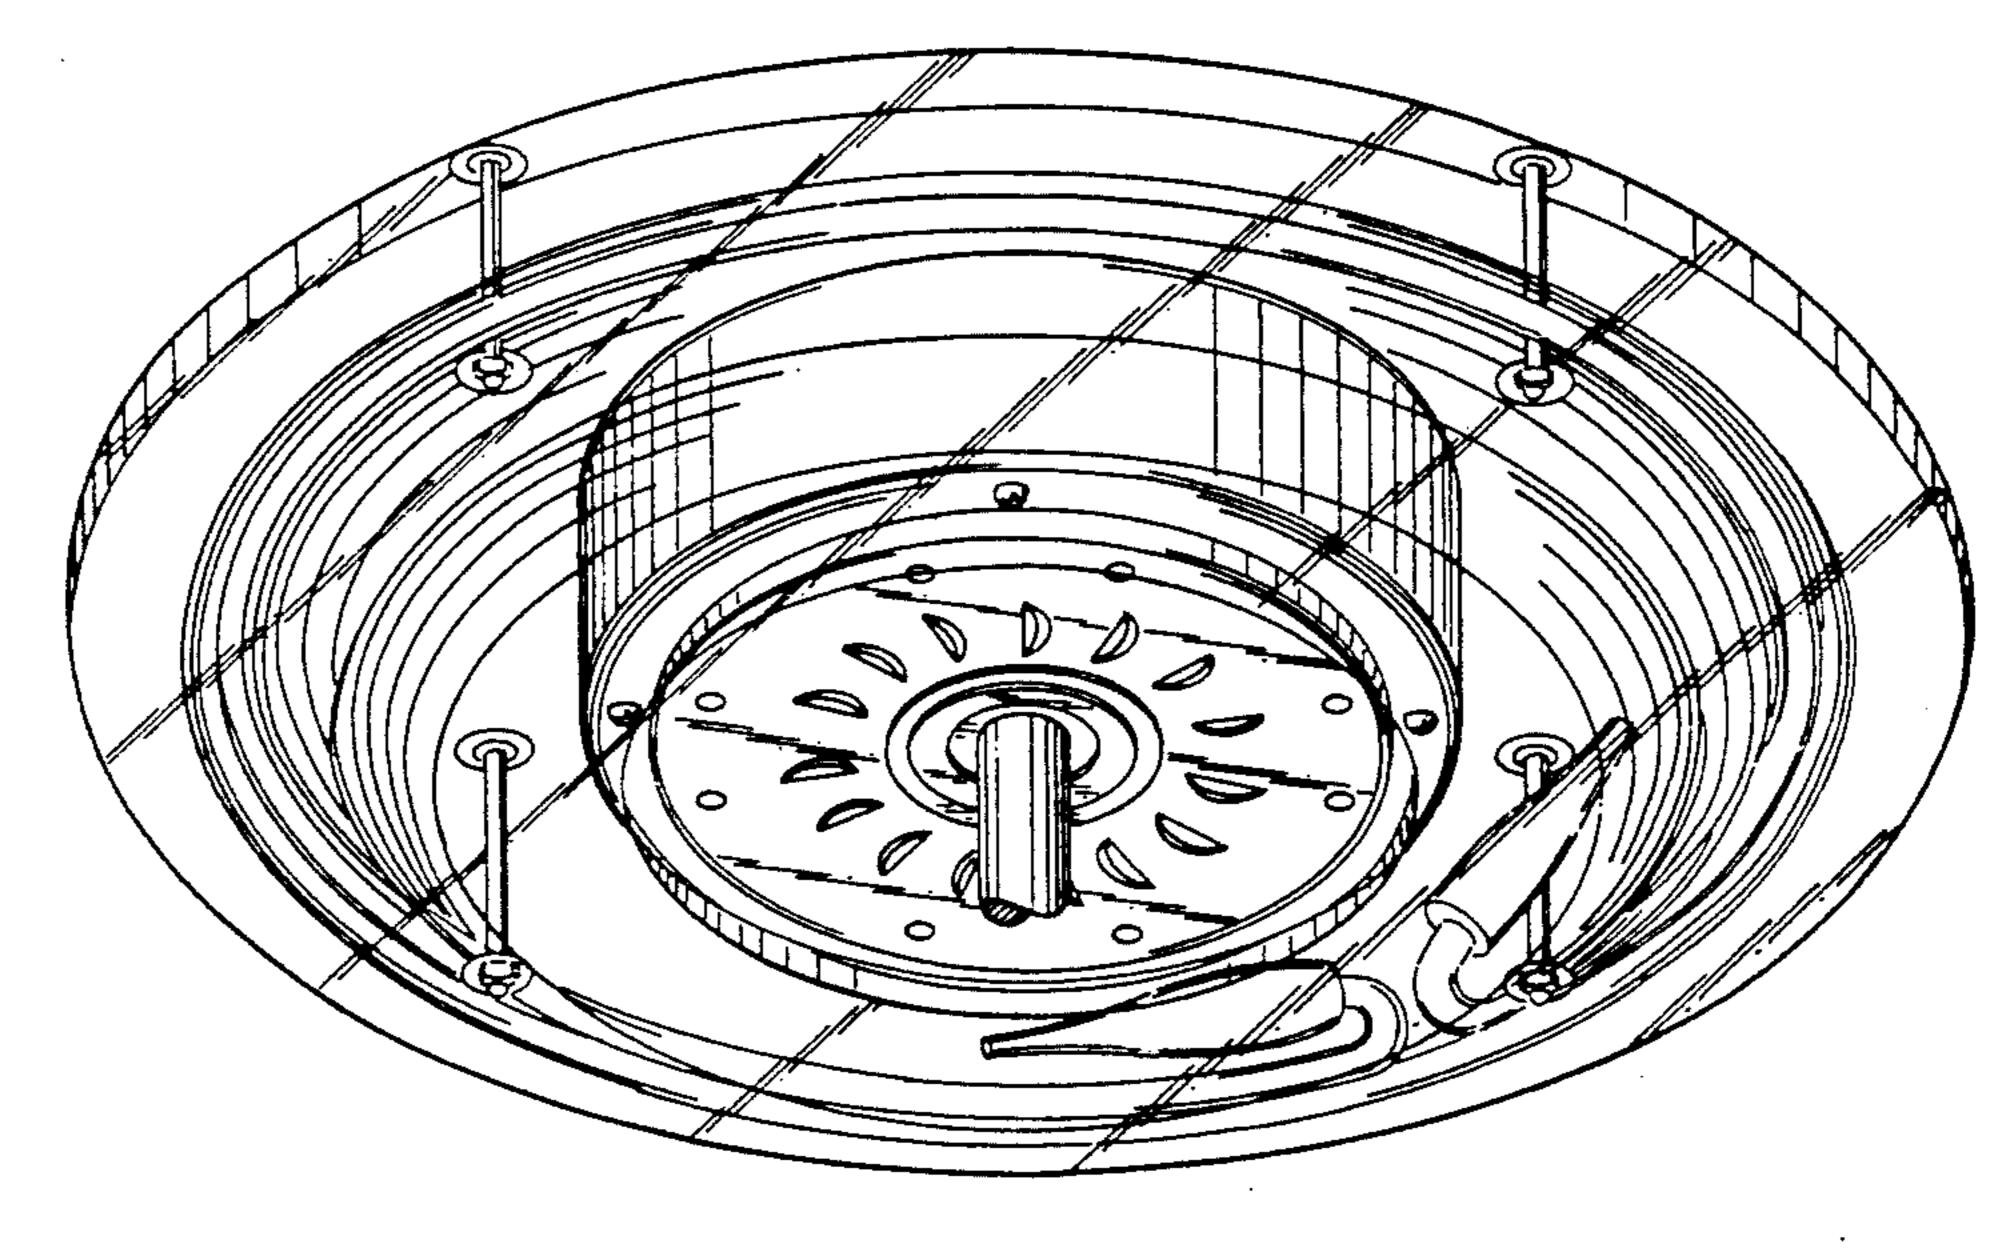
is a perspective view of the combined neon ceiling fan motor housing and support rod showing our new design;
